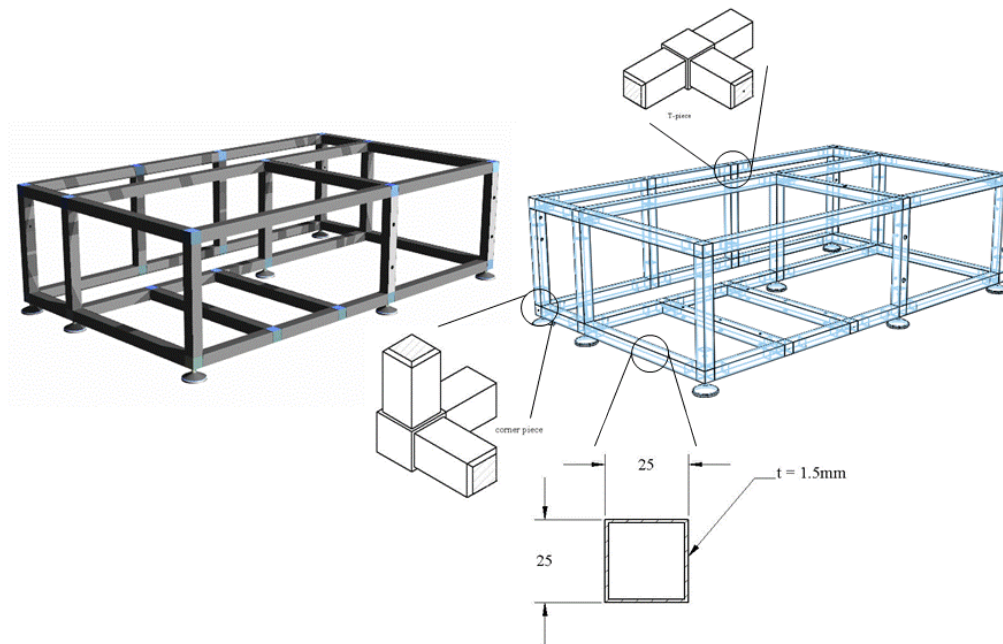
Frame assembly; steel tubing was cut to size and adjoining members were held together using a selection of connecting pieces. The structure was carefully designed to accommodate all of the tribometer’s components, incorporate a non-obstructive space sufficient for maximum slide translation in the x and y axes, yet remain as compact as possible.
